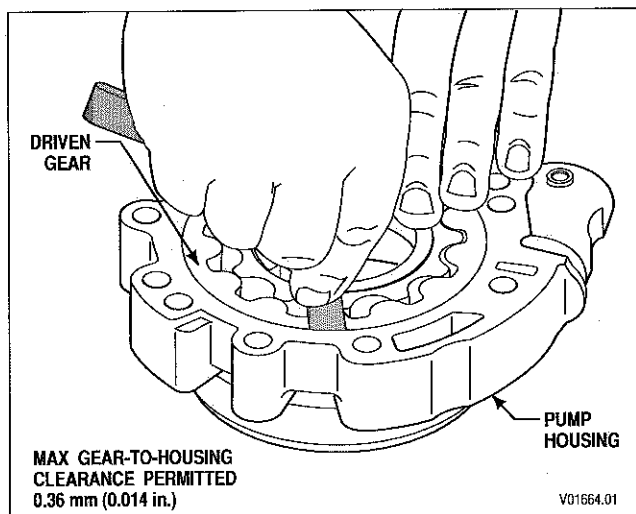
Measuring Driven Gear Clearance In The Pump Housing
